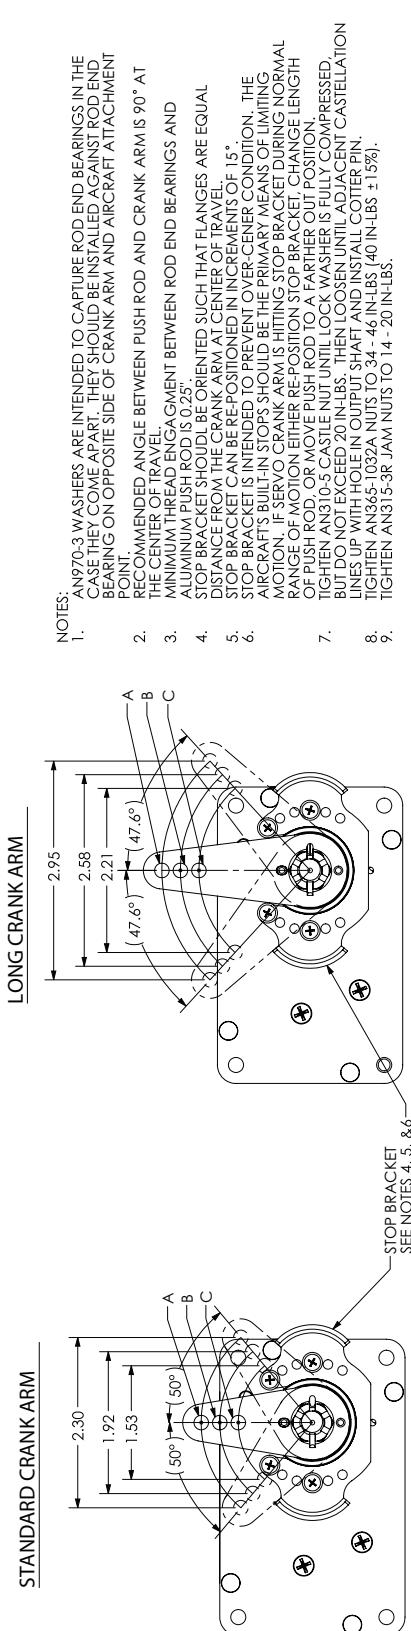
GSA 28 Crank Arm Attachments Drawing
